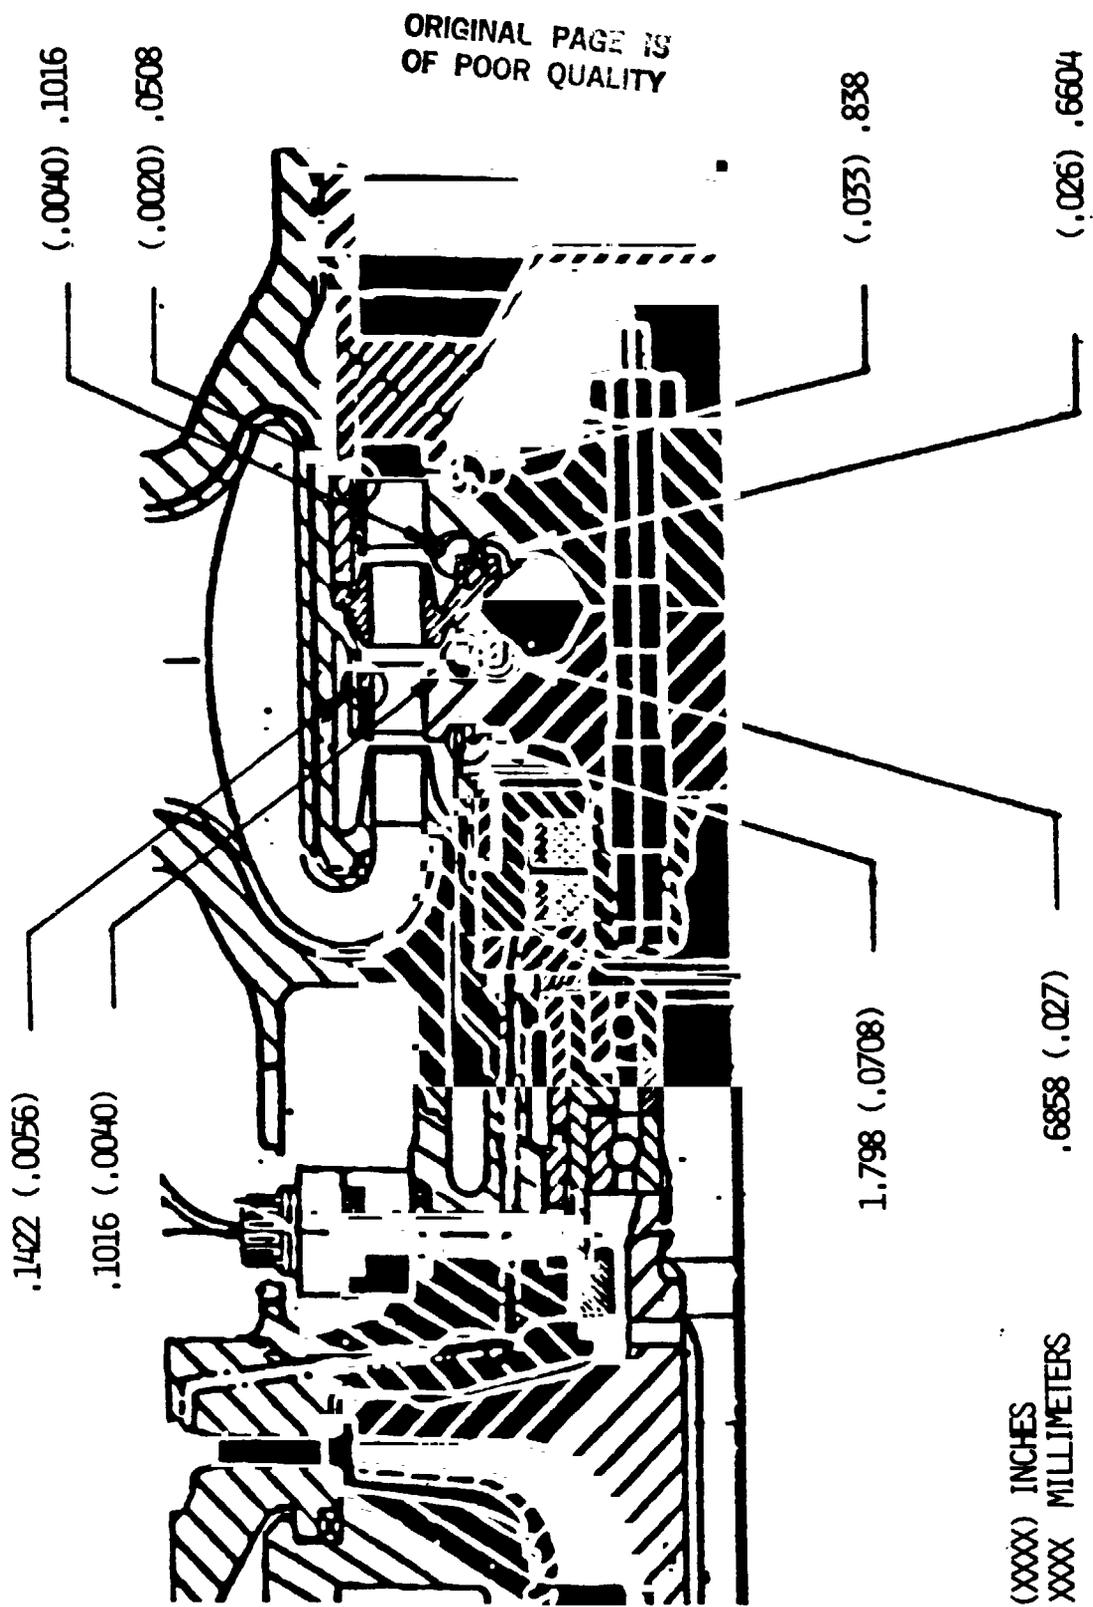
Mark 48-F Turbine Seal Diametral Clearances
